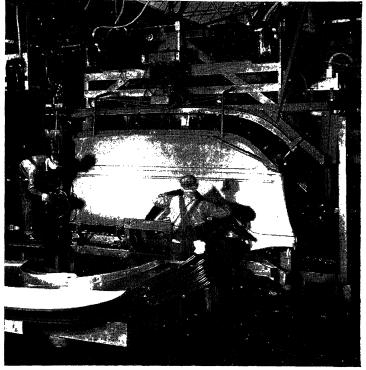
Assembling parts pressed out as in Fig. 72 to form an automobile body.
